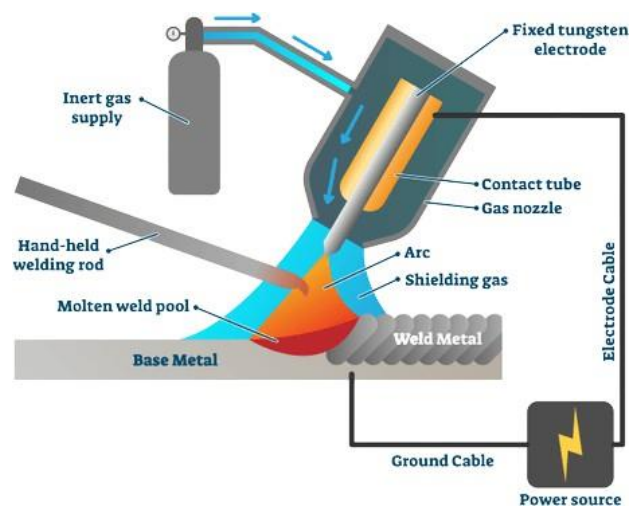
Schematic Diagram of TIG Welding System. [Ref: 32]
